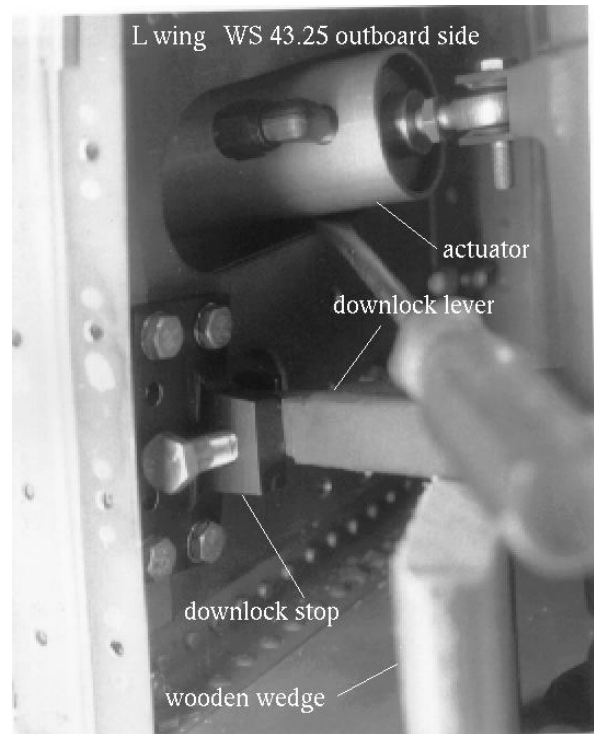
The left main gear actuator and downlock lever. The screwdriver is not part of the assembly!
